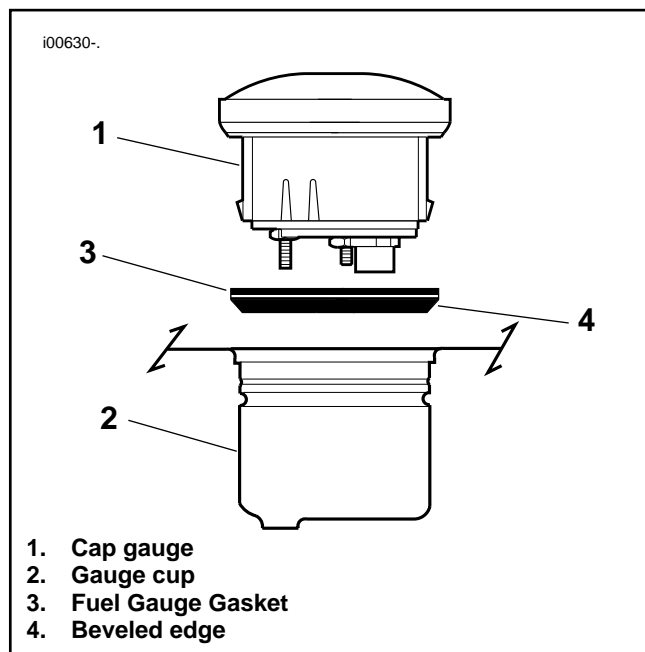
Fuel Gauge Gasket Placement on Cap Gauge
